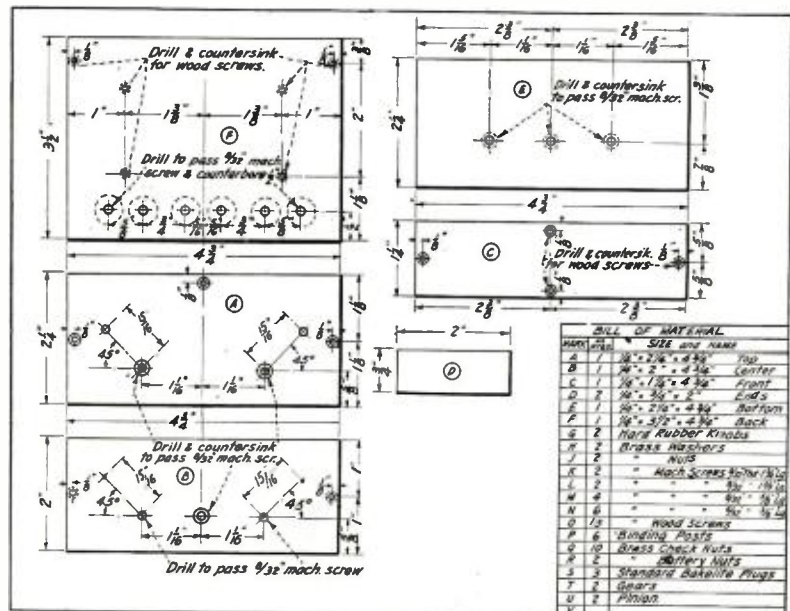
This drawing gives the dimensions of the pieces of wood which are used in the construction of the H.C. coil mounting.
